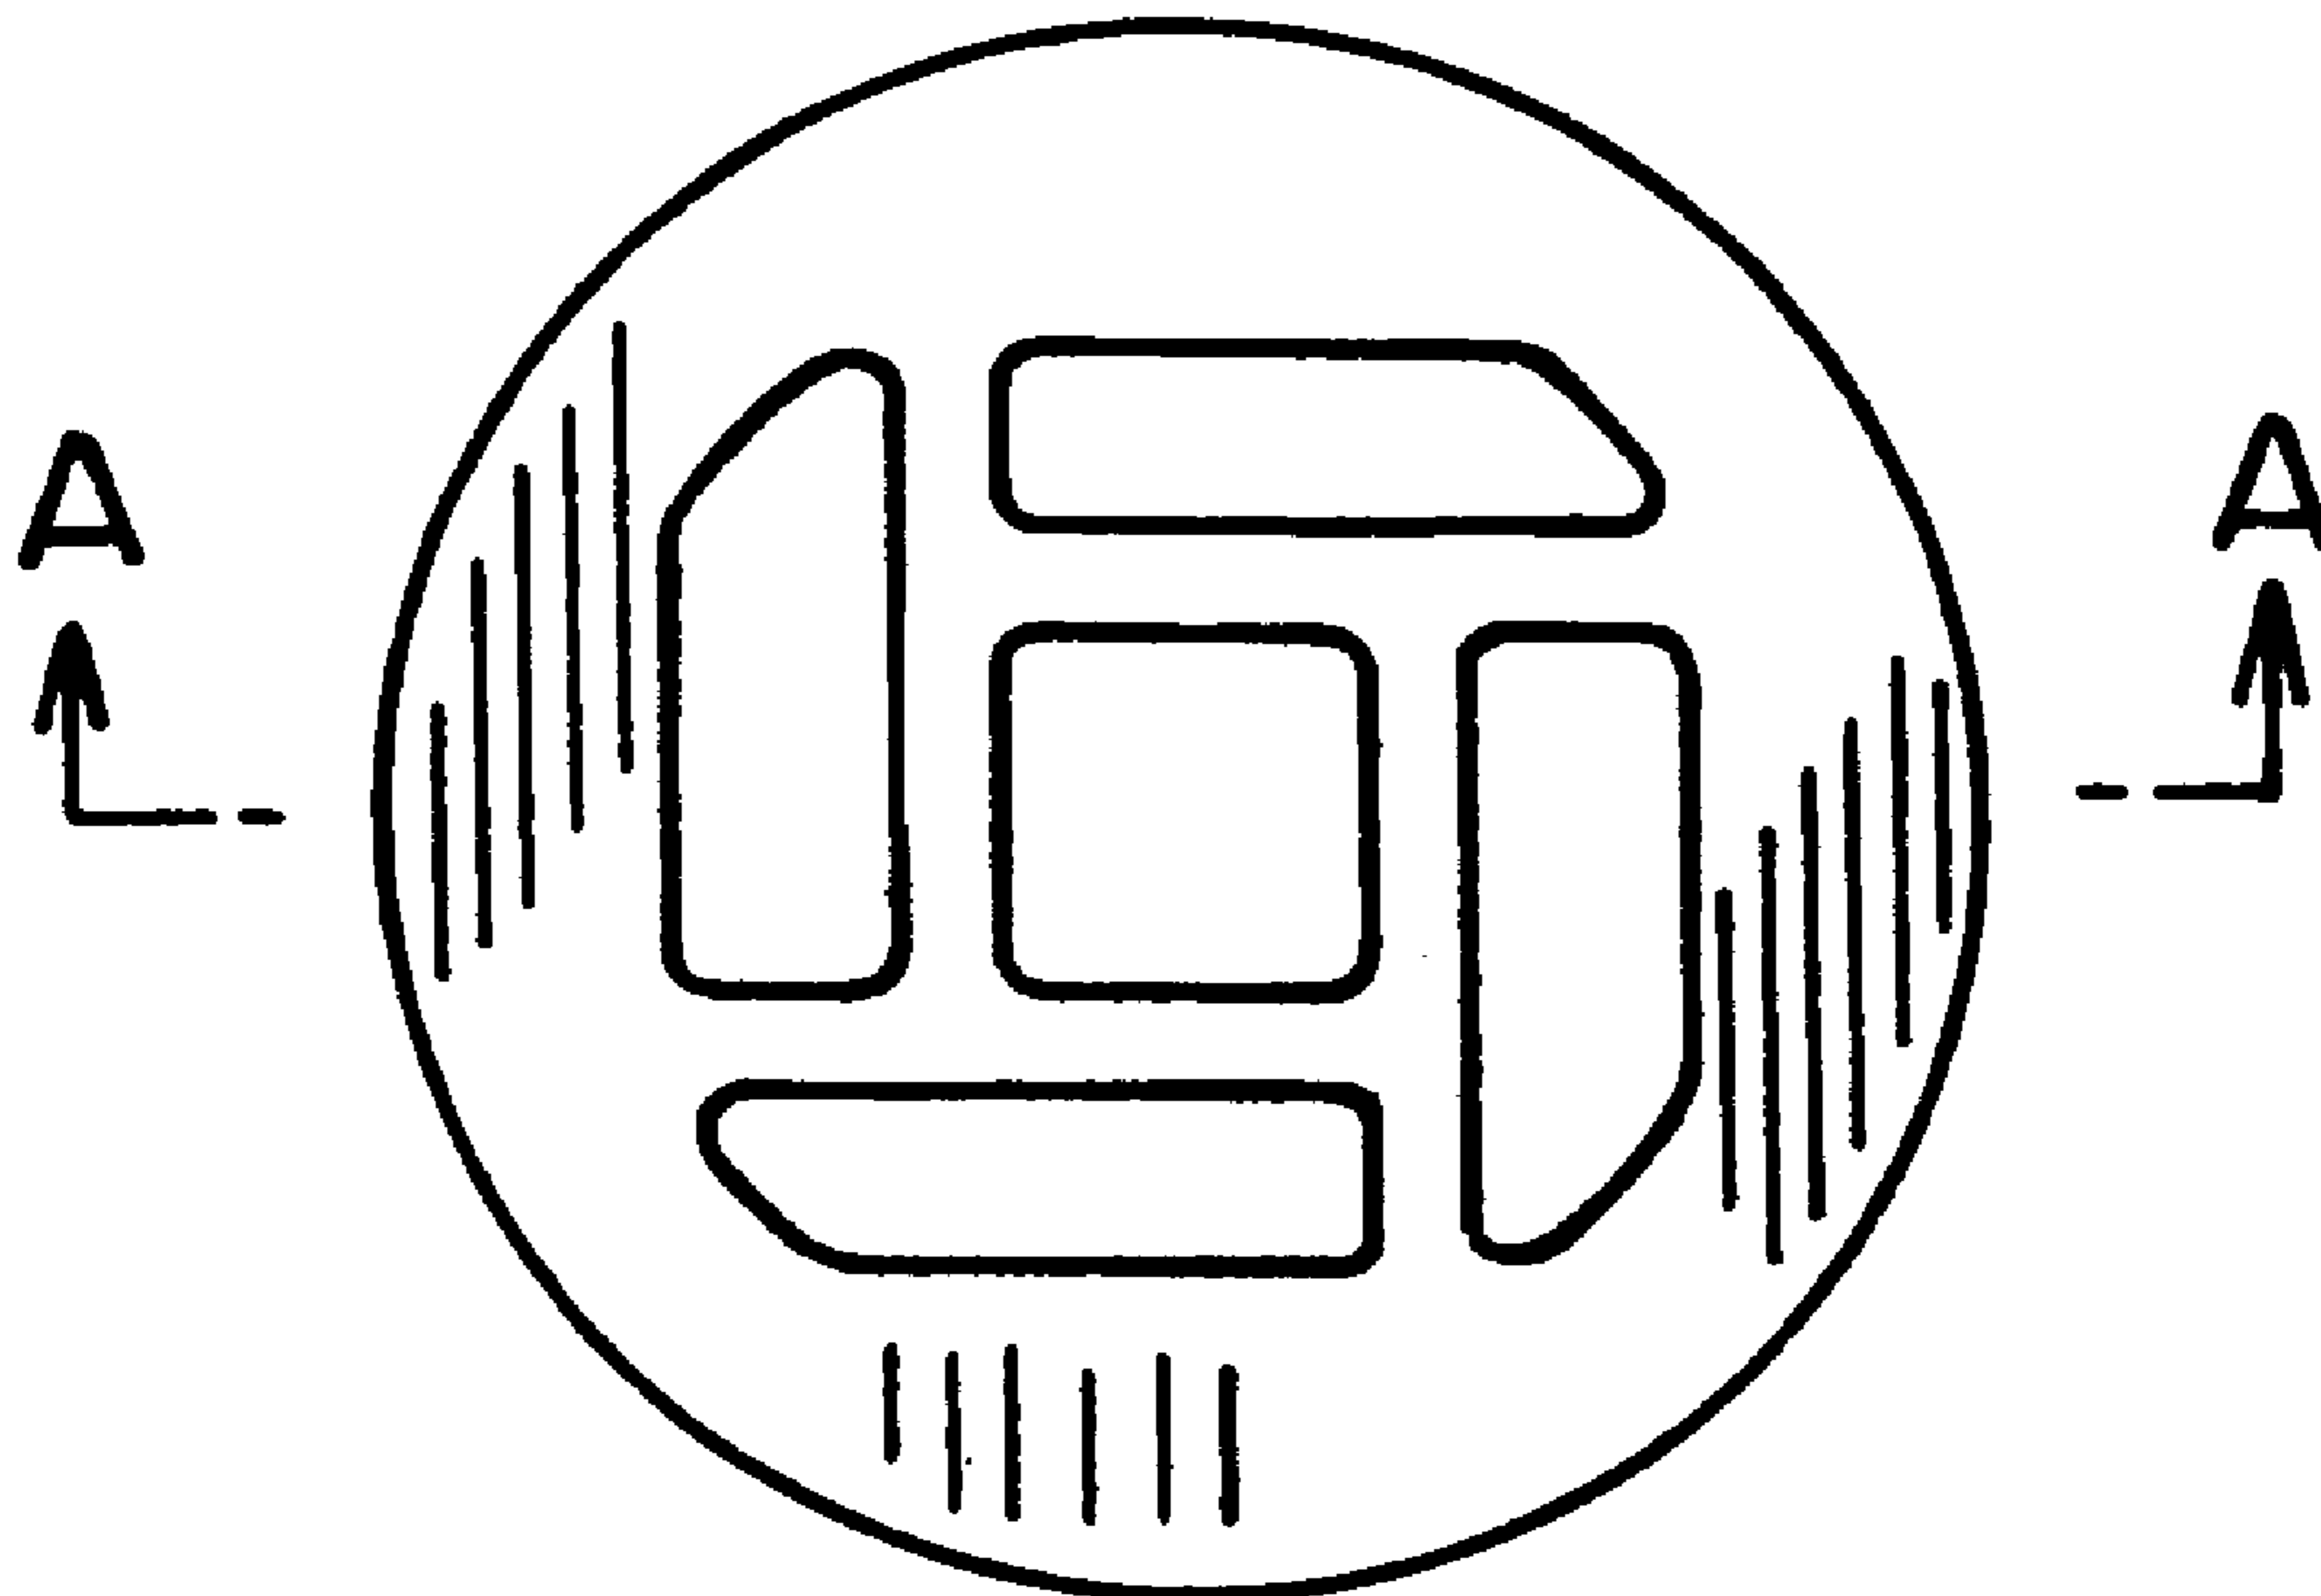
is a top plan view of the ring for probe card showing our new design, the bottom view being a mirror image thereof;
